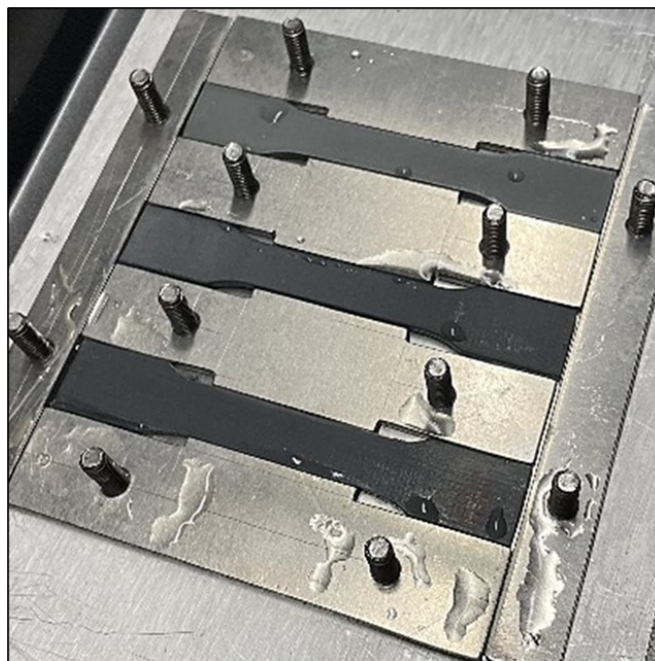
Holding fixture used to restrain the specimens during annealing and subsequent quenching. There is an aluminum top cover (removed in the photo) to hold the specimens flat and reduce warping.
